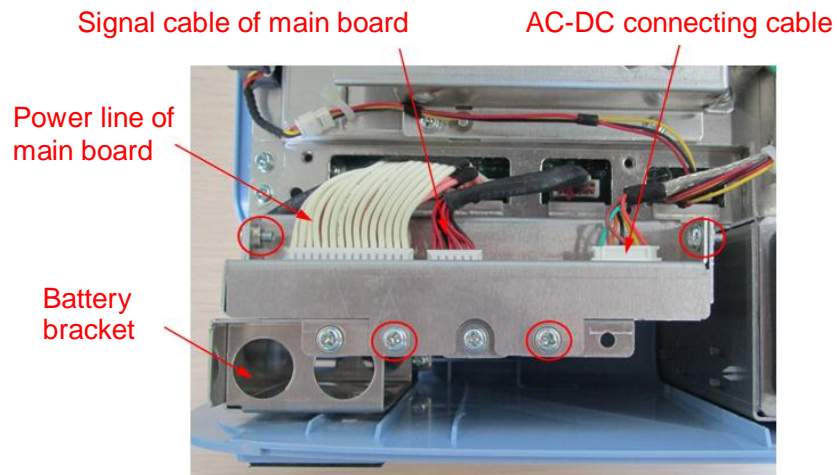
Disassembly of DC-DC board (not support the battery) (2)
